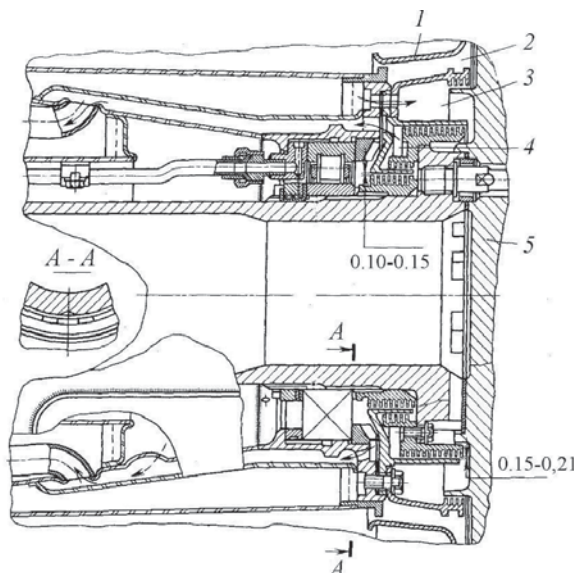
Turbine support with reduced heat input to the inner ring of the bearing [15]
